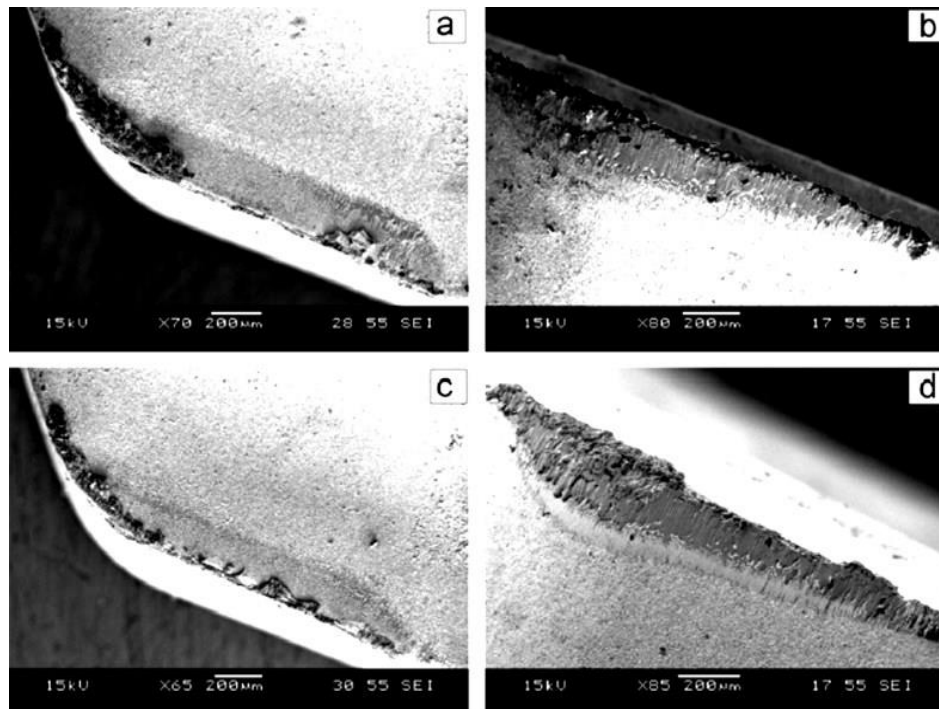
14 Tool damage (a) rake face (b) flank face of cutting tool inserts at speed 160 m/min with laser heating, and (c) rake face (d) flank face of cutting tool inserts under similar machining circumstances under without laser heating (155)
